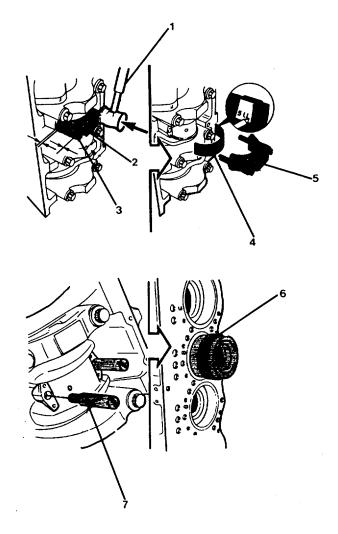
Connecting Rod and Piston Assembly Removal.
